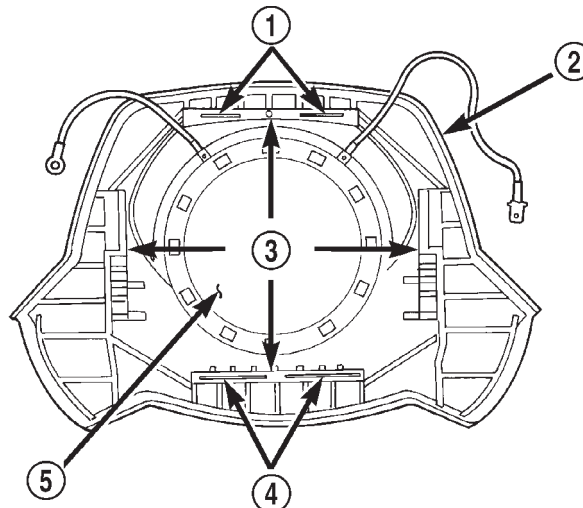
Driver Side Airbag Module Trim Cover and Horn Switch - Typical
